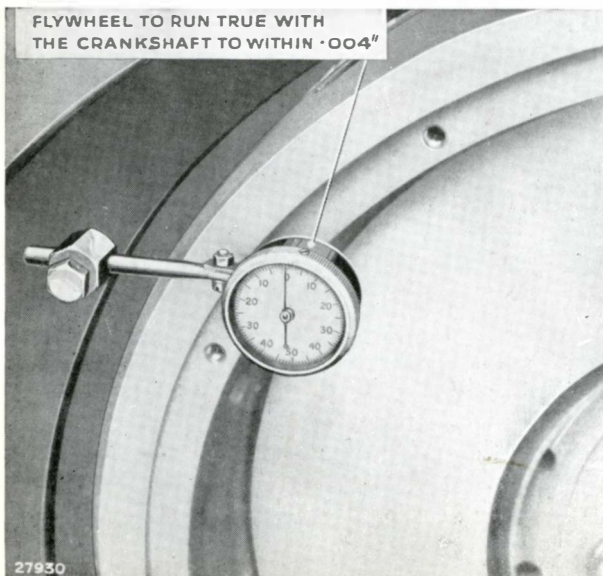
CHECKING FLYWHEEL FOR RUNNING TRUE
